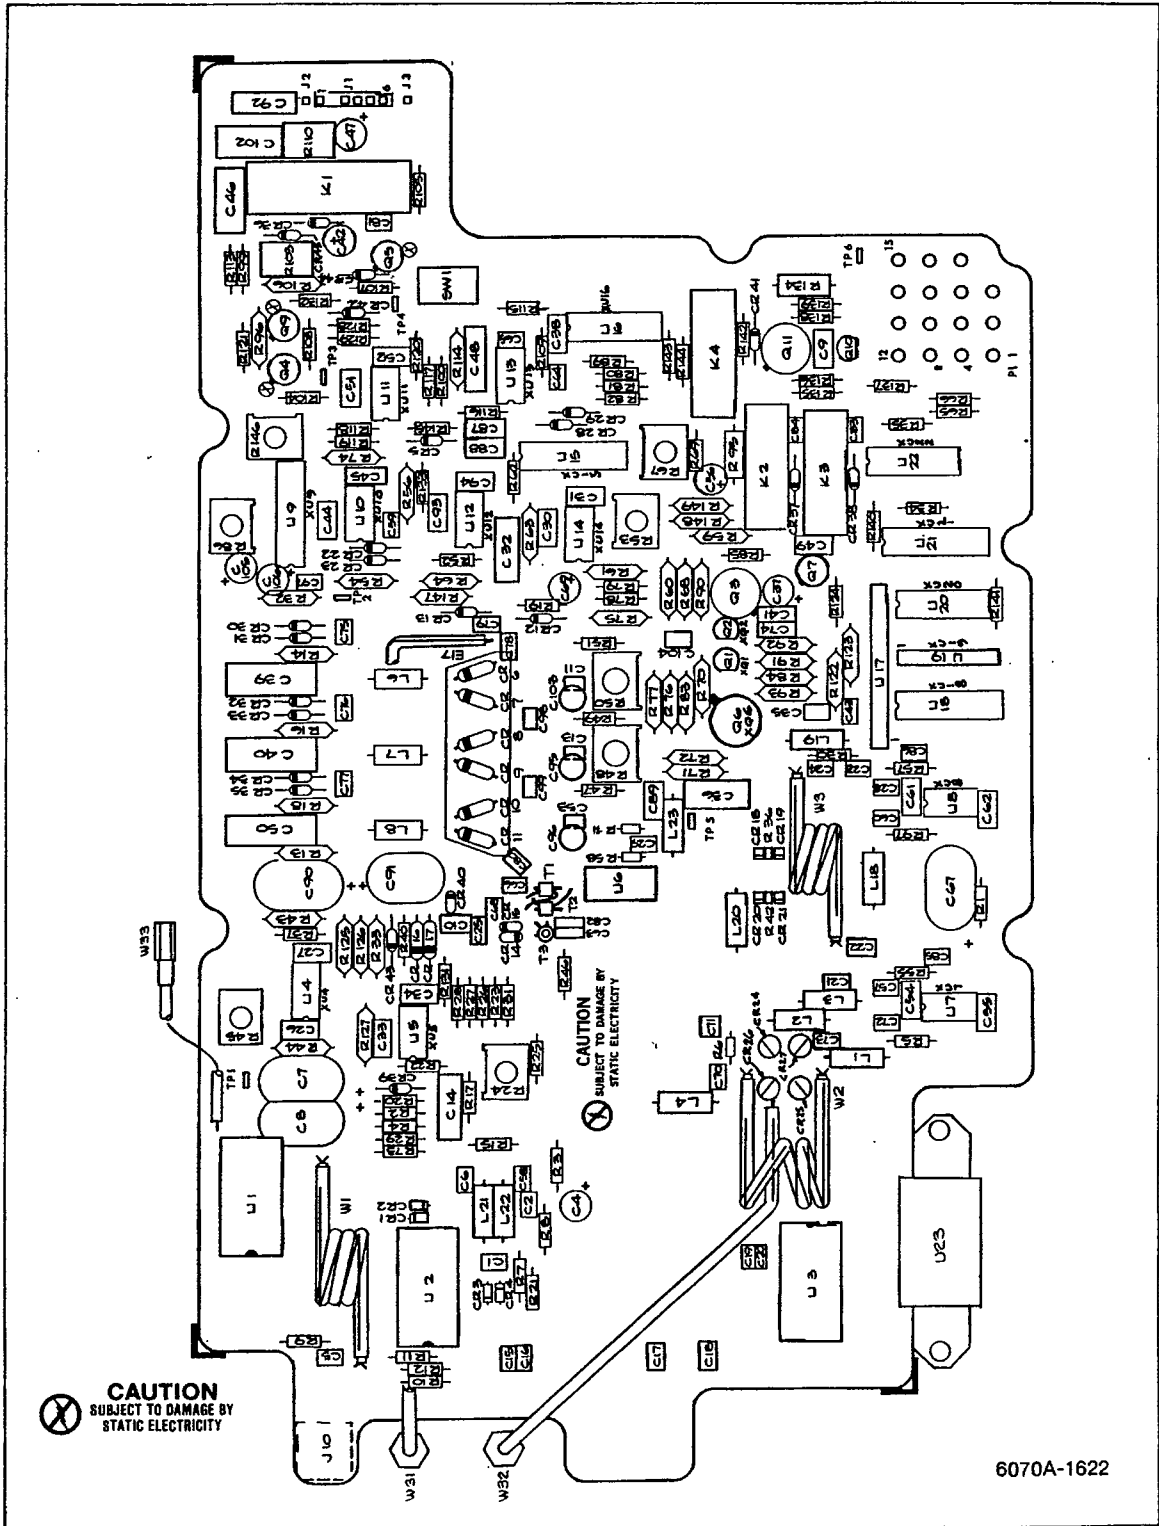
A3A3 Delay Discriminator PCB Assembly
